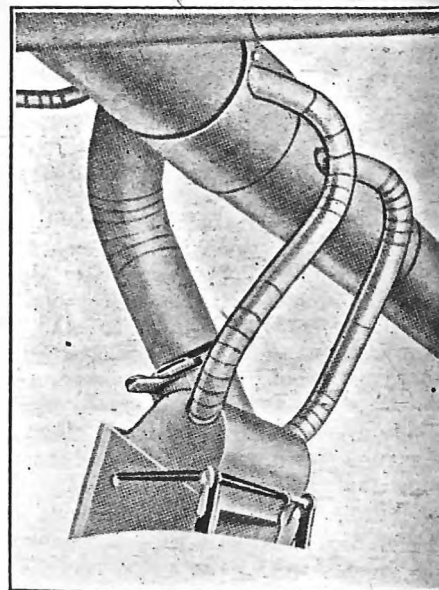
COVER HOOD AND EXHAUST CONNECTIONS FOR CYLINDER HEAD OF CARDING MACHINE.
